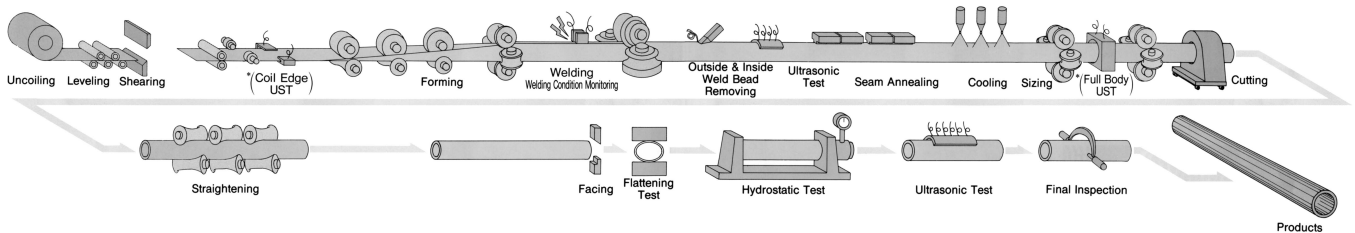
Manufacturing process of NSC Hikari 24" electric-resistance-welded (ERW) pipe mill
